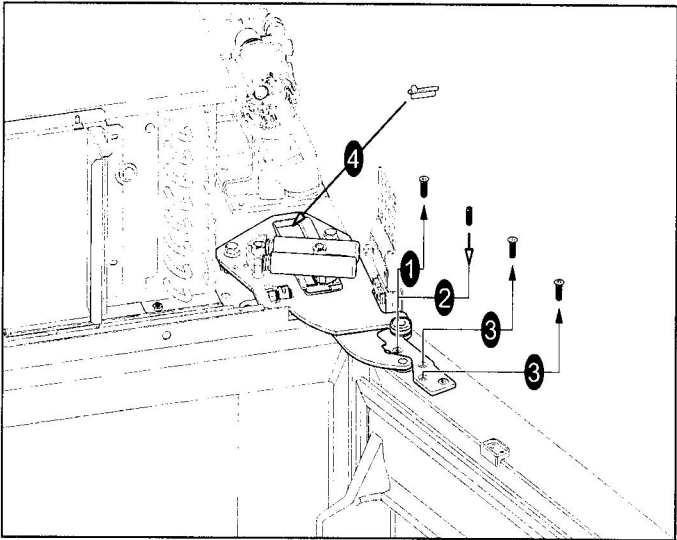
Top Door Hinge Screw Removal, Setscrew Installation and Spacer Installation
